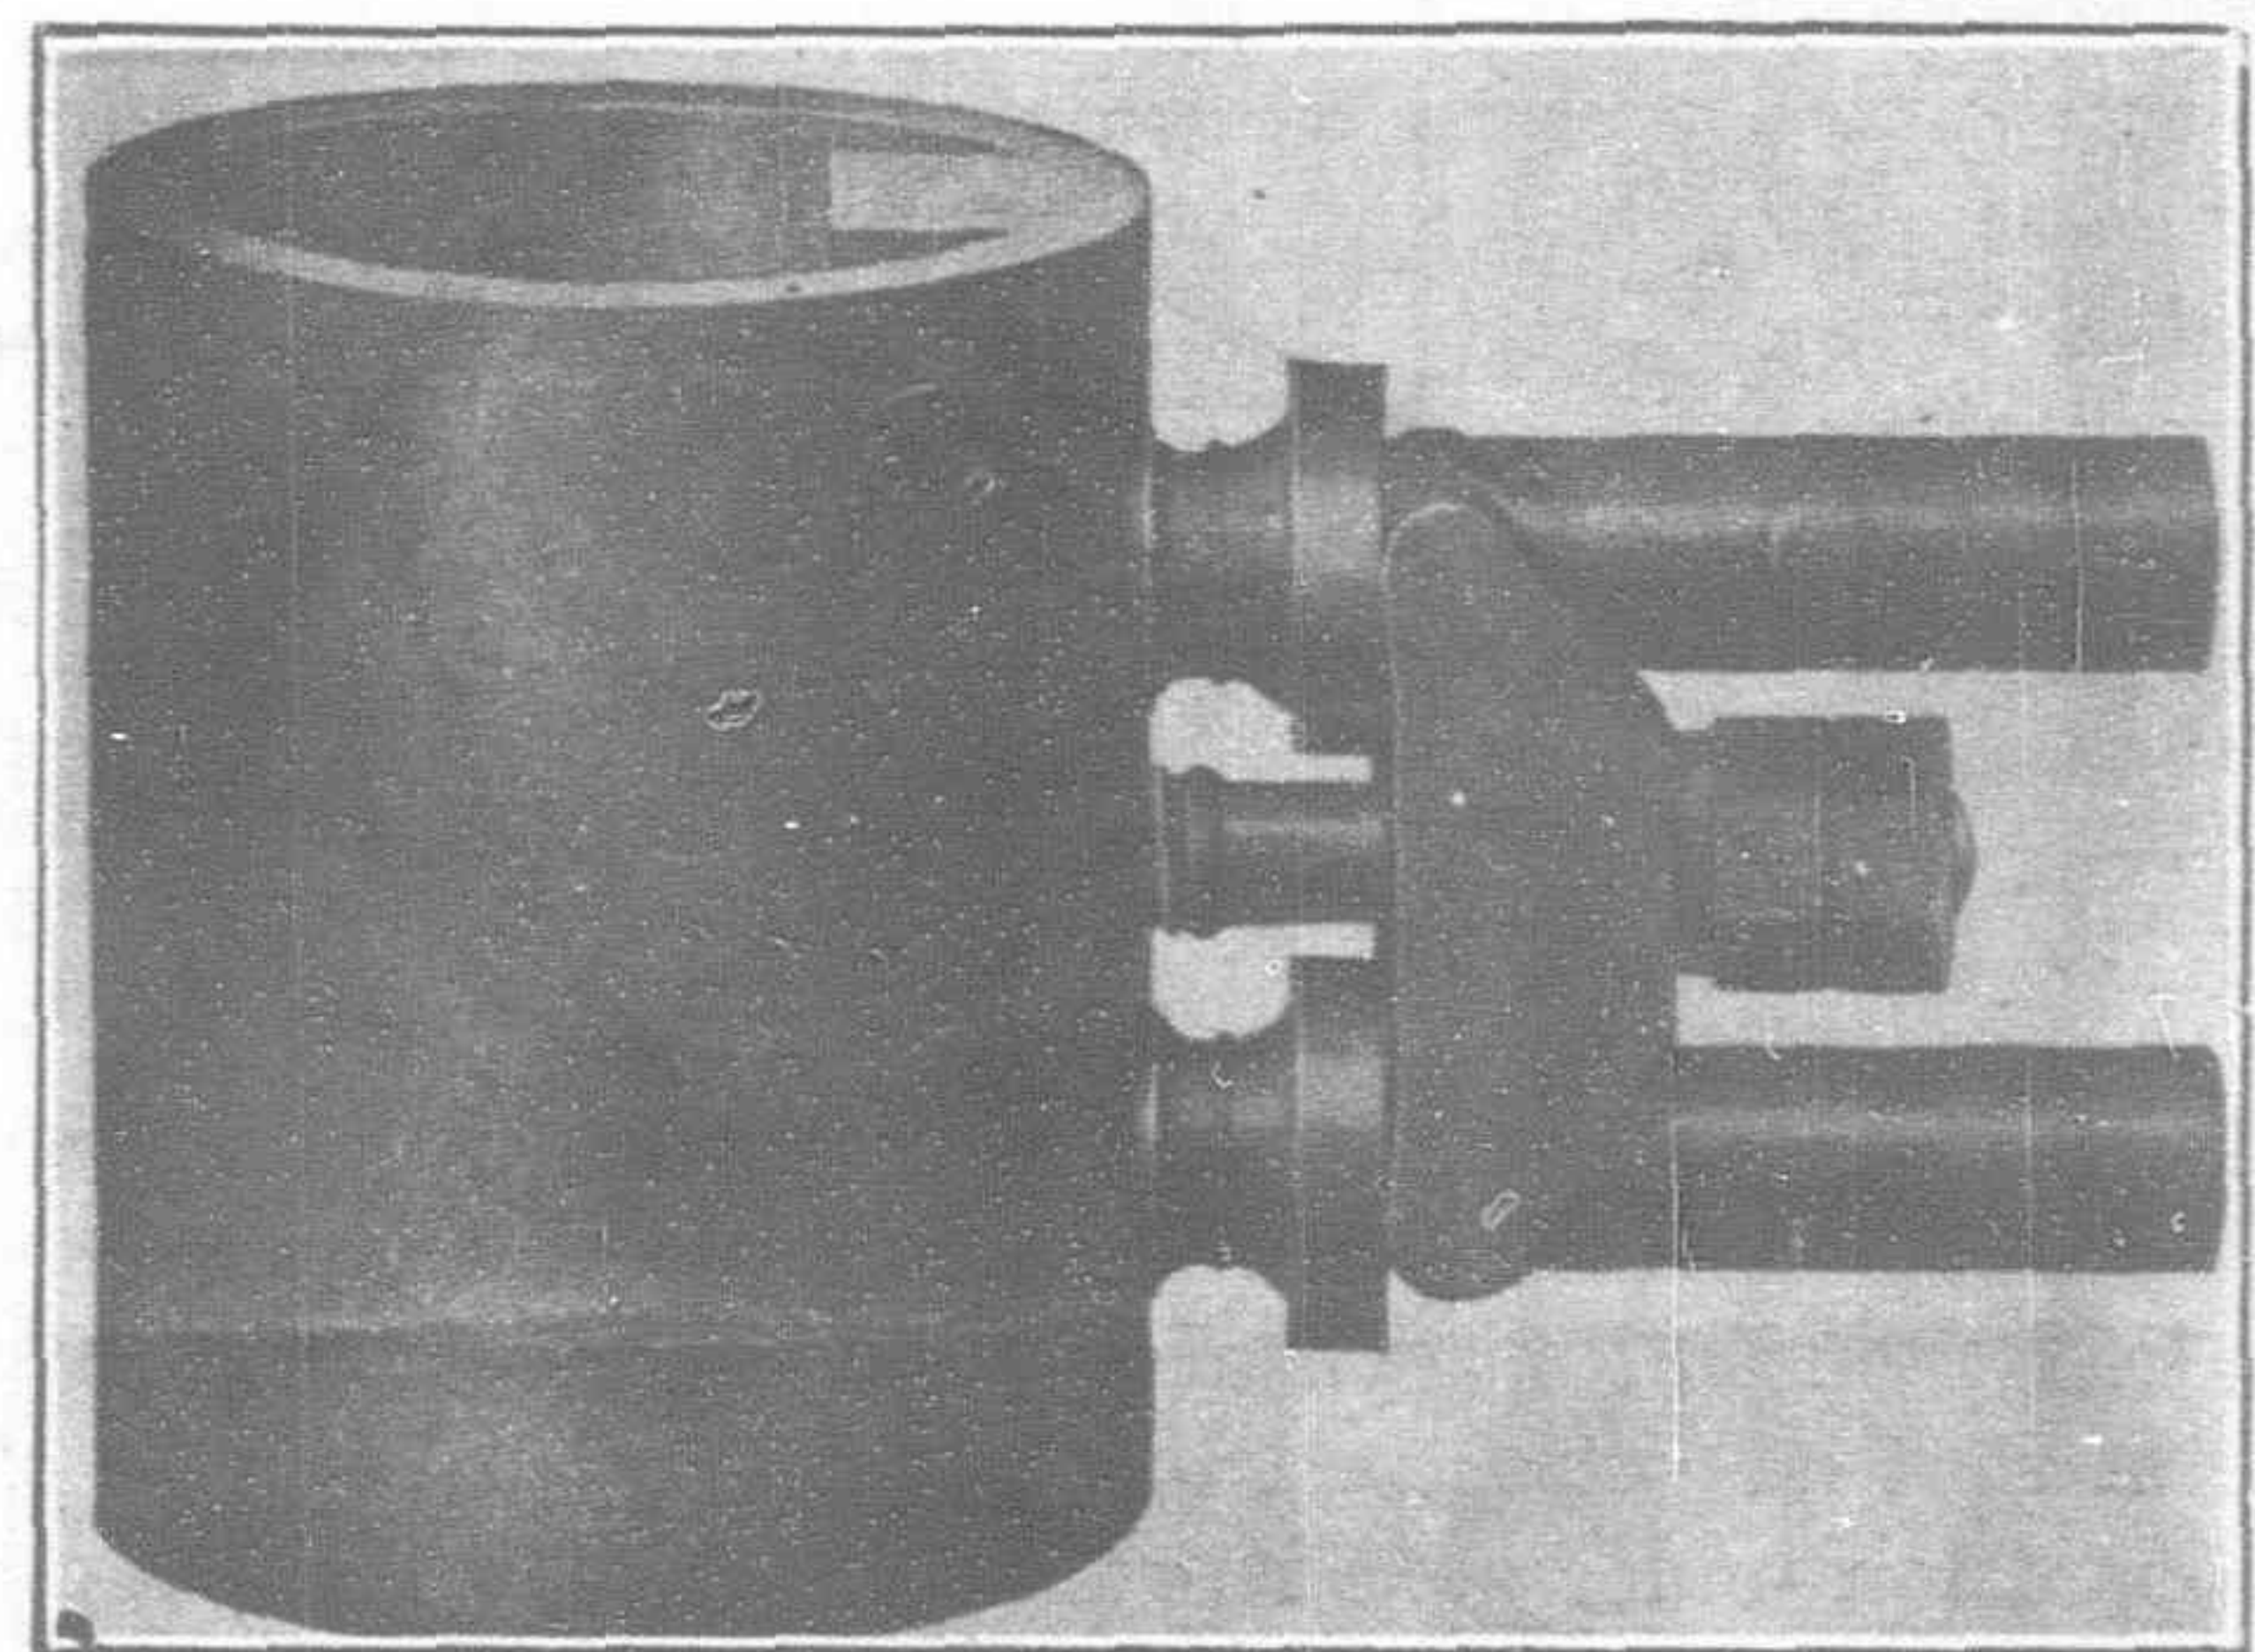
Section of Header and Units Showing Ball Joint Construction
